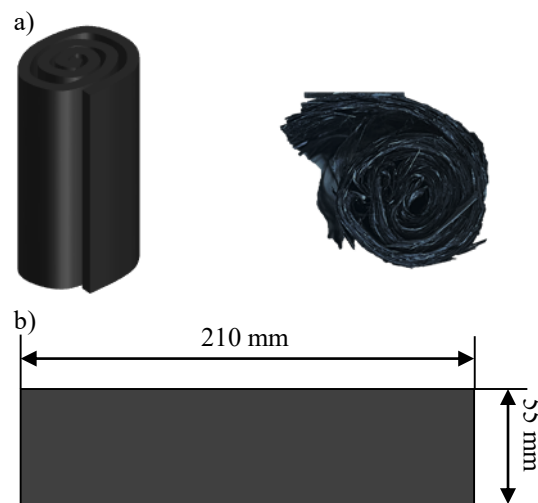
Spiral charge of SMC: a) front and top view, with top view being an actual specimen, b) measurements of each rectangle rolled up to a spiral
